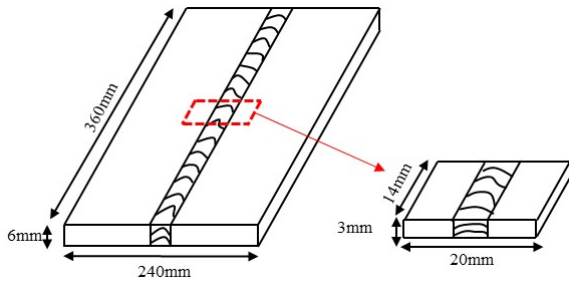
A diagram of welding specimen for stress corrosion test
